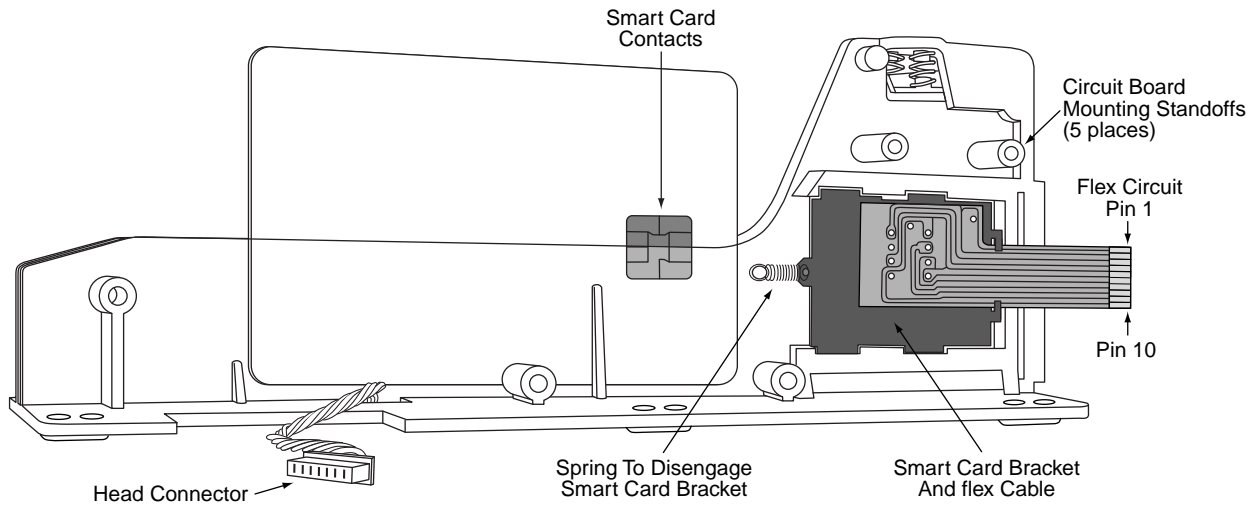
Smart Card Bracket and Flex Cable Side of Swipe & Park Reader
